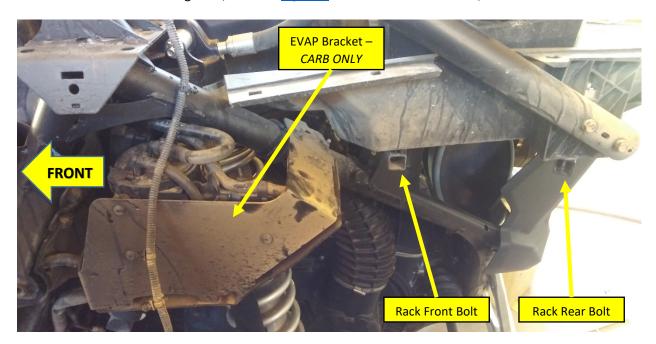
Air Compressor Bracket Mounting Locations (side view w/o fender – CARB Version shown)
